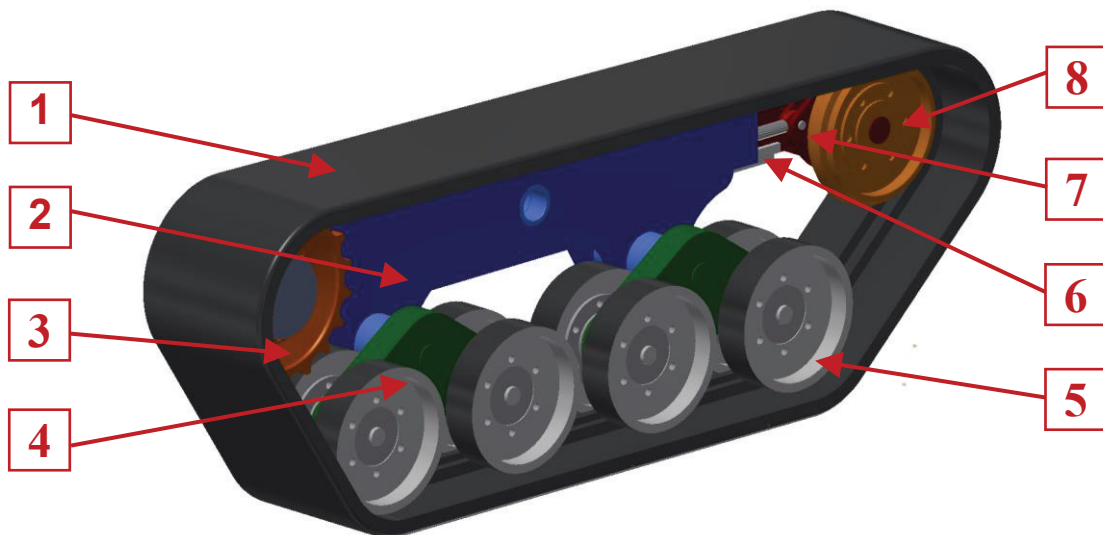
The resulting concept of the track chassis module; 1 – rubber track, 2 - frame of the track module, 3 - drive wheel with hydraulic motor, 4 – bogie arm frame, 5 - wheels, 6 - tensioning hydraulic motor, 7 - tensioning telescopic device, 8 – tensioning and lead wheel [3]
